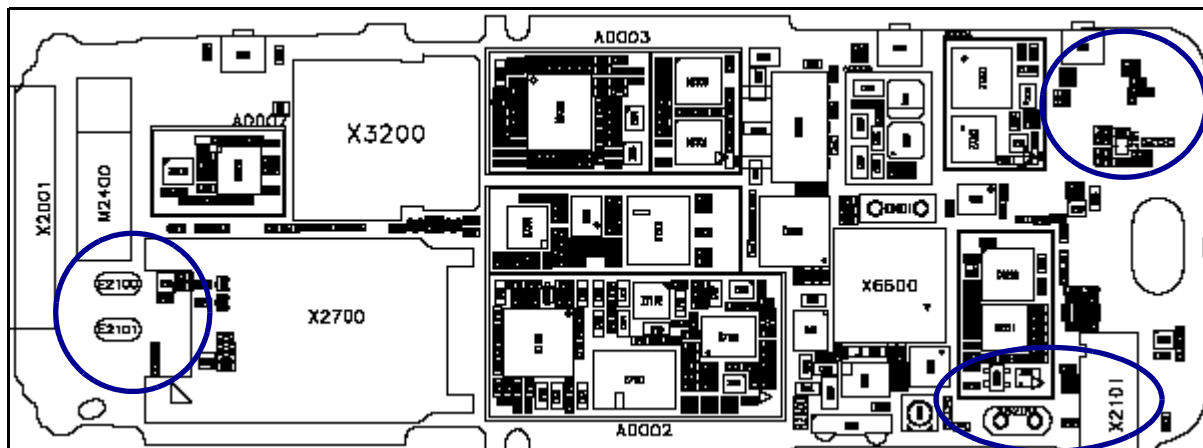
Bluetooth matching chips on the bottom PWB component layout
